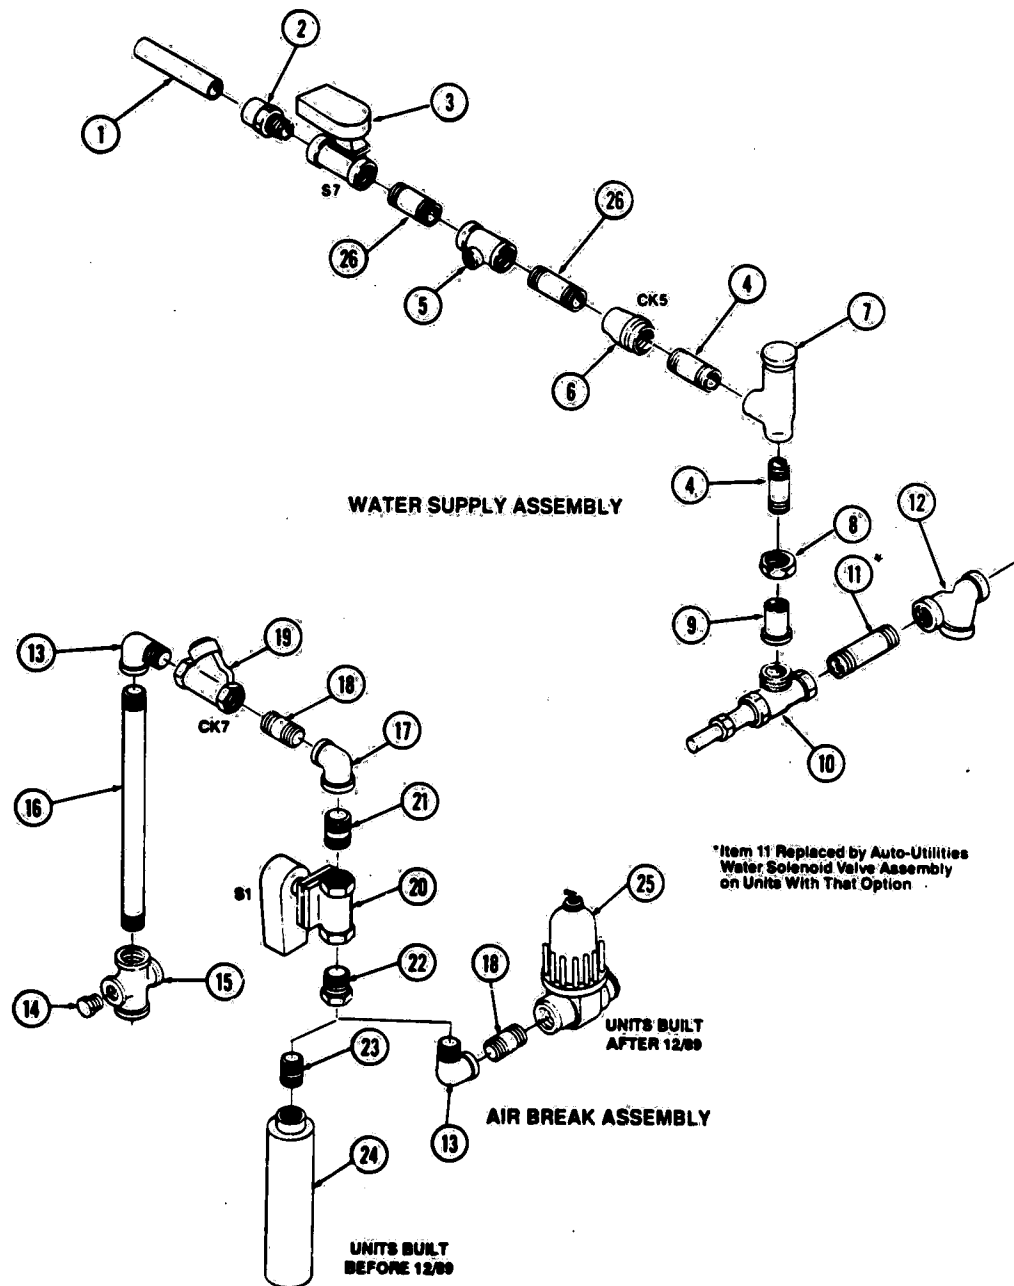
WATER SUPPLY AND AIR BREAK ASSEMBLIES - Vcamatic
